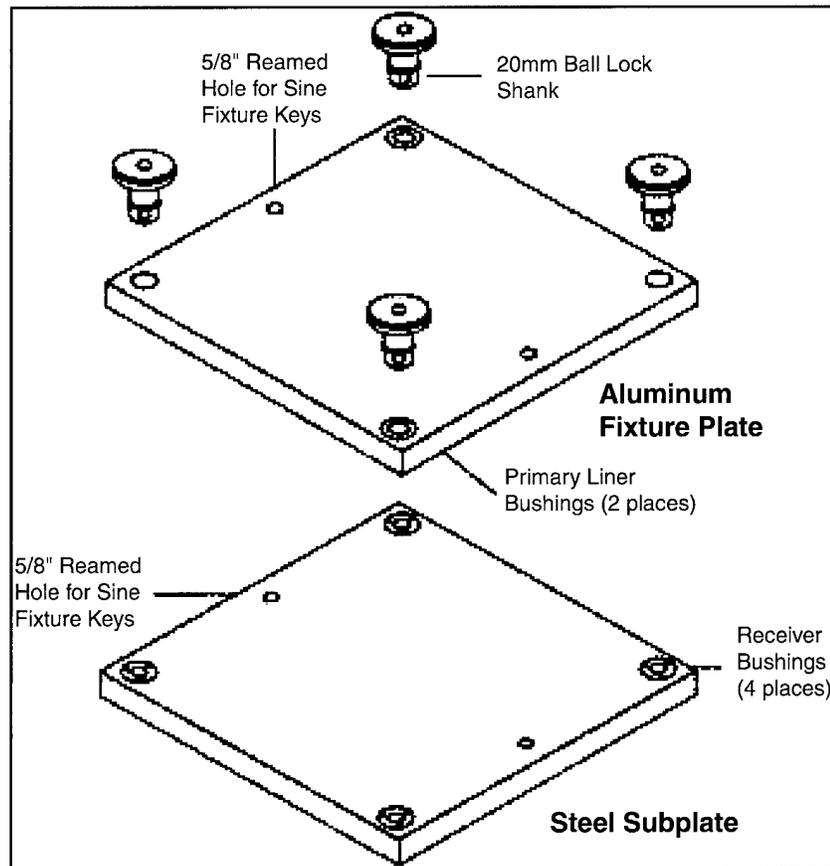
Ball Lock Sub-plate and Fixture Plate
